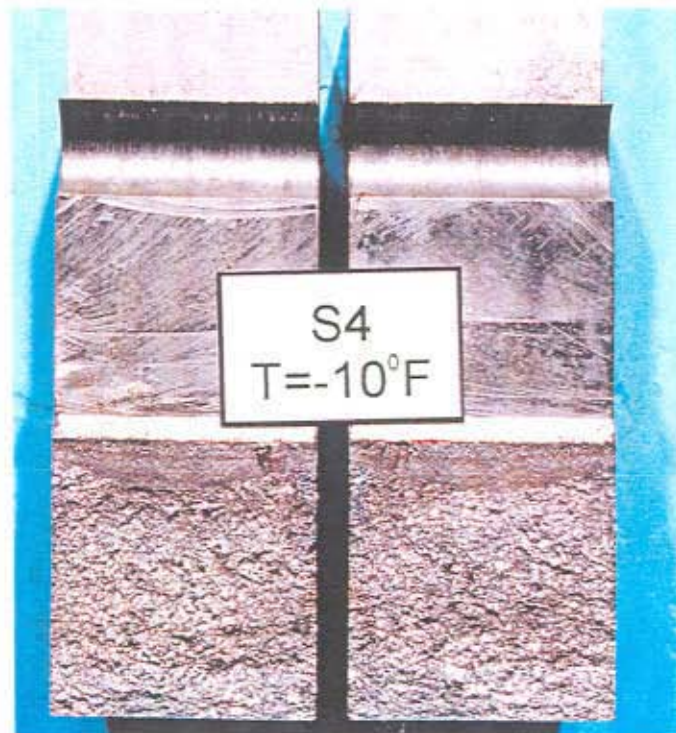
Fracture Surfaces of Test Specimen S4. (6/00/3-9)
